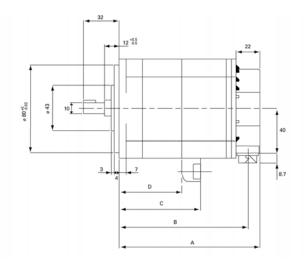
β0.4is, β0.5is and β1is Series Servo Motor Outline Drawing
